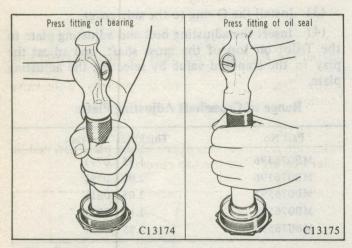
Press Fitting the Oil Seal and Ball Bearing
